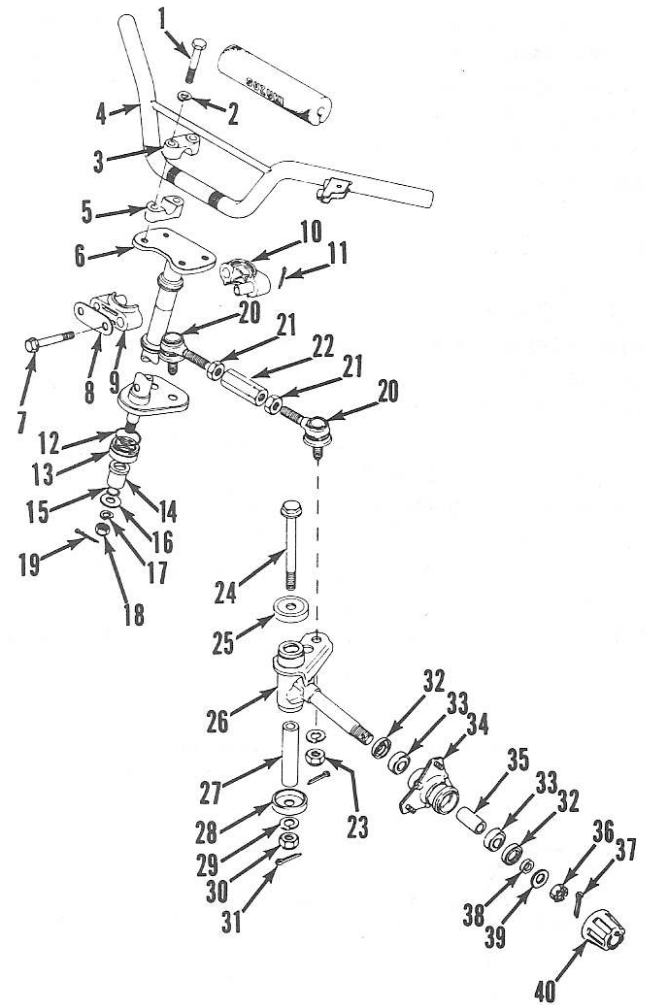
Exploded view of steering and front axle assembly used on LT50 models.
